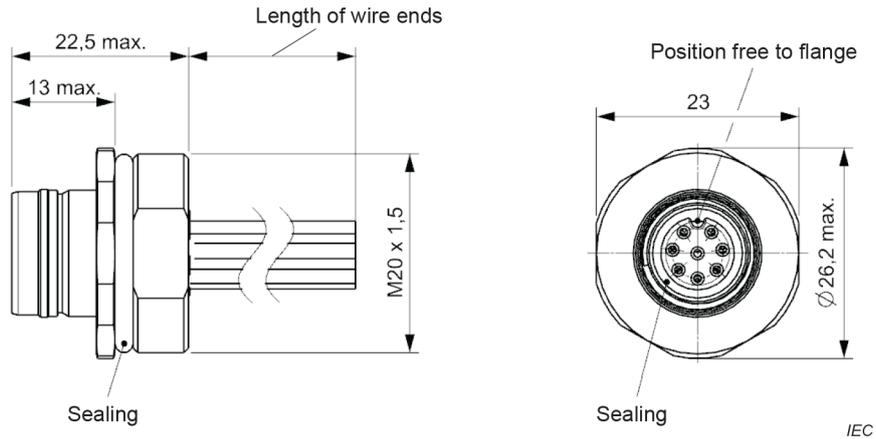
Fixed connector, female contacts, mounting with thread M12 × 1 and outer push-pull locking, with wire ends, single hole front mounting thread M20 × 1,5
